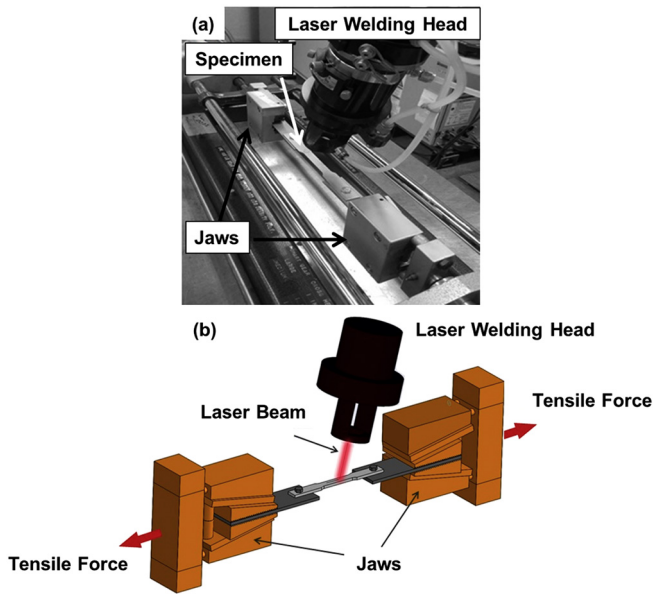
(a) and (b) The developed setup to apply external loading during laser beam welding.
